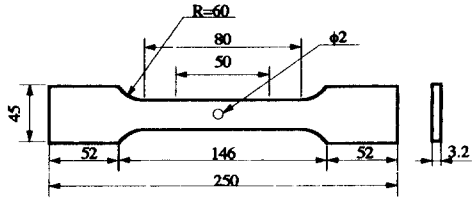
Dimension of specimen for SSRT. (JIS K 7054)
